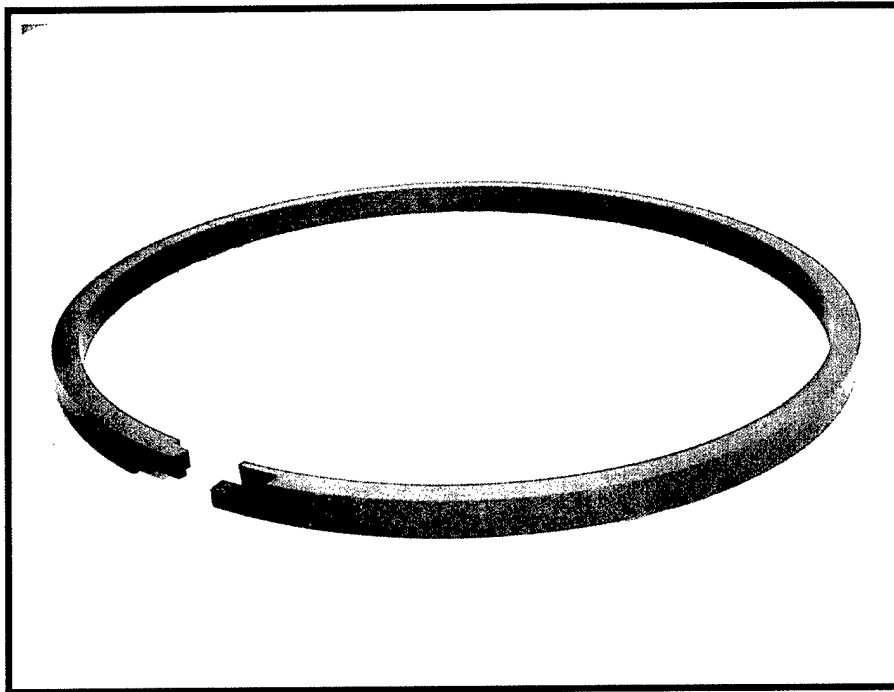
Typical “Gapless” Design. The opposing ends form a tongue-in-groove type of lap-joint seal when the ring is compressed. (Grover Piston Rings Inc.)
